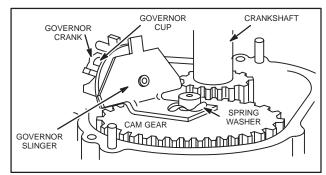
VERTICAL SHAFT GOVERNOR AND OIL SLINGER ASSEMBLY, TYPICAL
